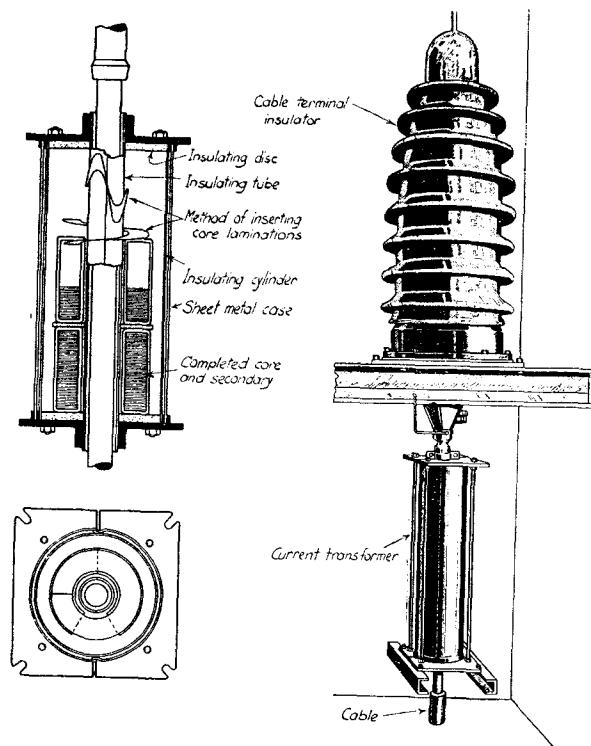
CURRENT TRANSFORMER FOR ASSEMBLY AROUND A CABLE (KOCH & STERZEL)
